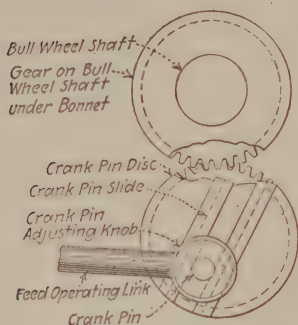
Shaper feed mechanism (operated by gears). The upper gear is fastened to the hub of the bull wheel and the lower gear is carried on a stud shaft in a bonnet. The crankpin disc is located in front of the lower gear. The gears are equal, therefore each revolution of the bull wheel causes an oscillating movement of the feed-operating link.
